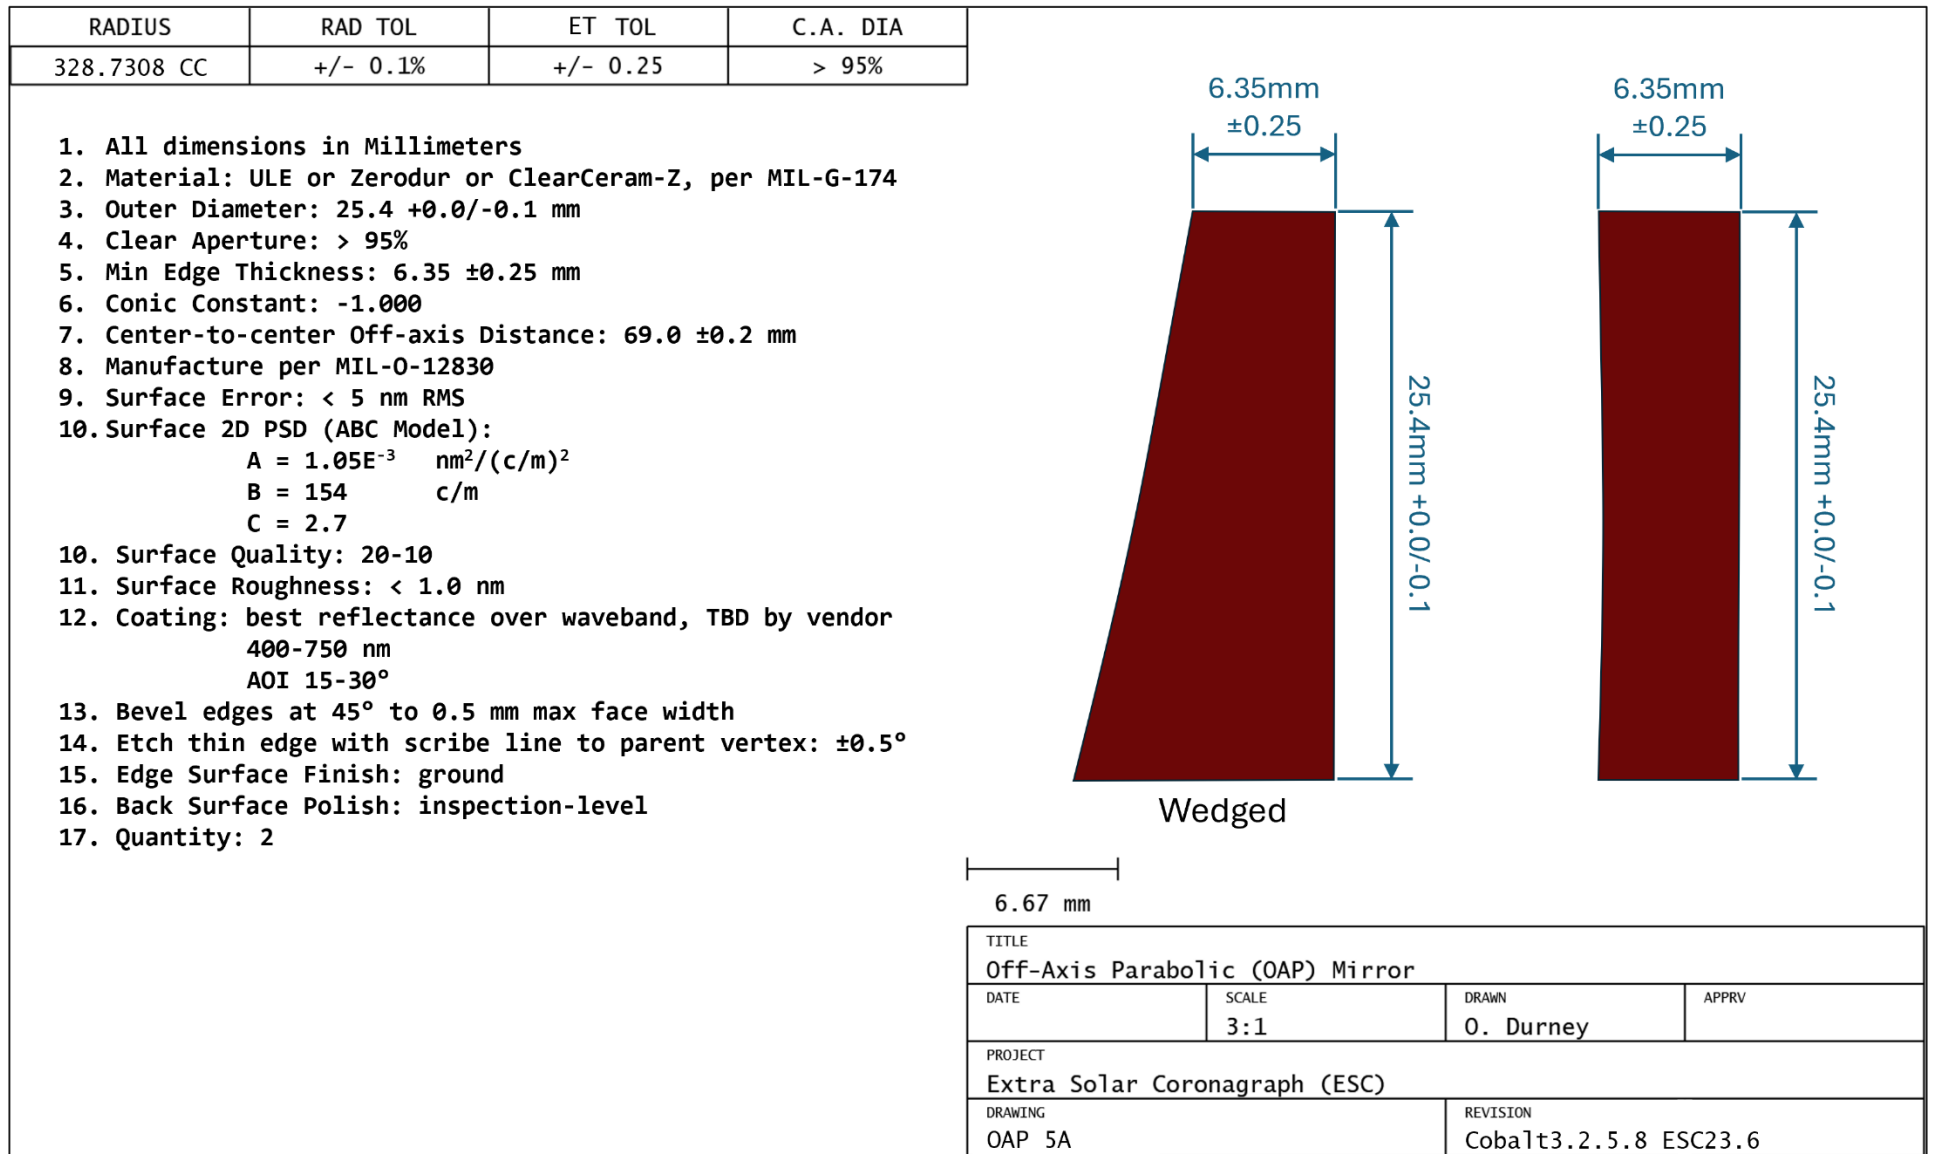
Off-axis parabolic mirror, OAP 5A drawing
